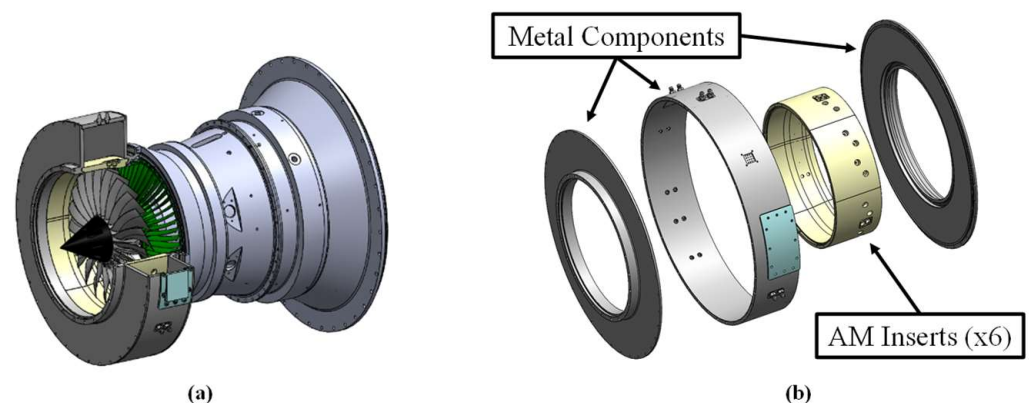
AM fan casing installed over the rotor (a) along with an exploded view (b) for reference.
